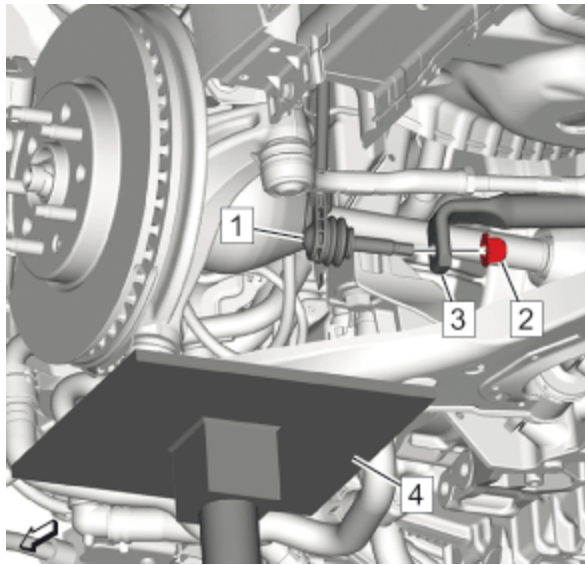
Stabilizer Shaft Link, Stabilizer Shaft And Nut
